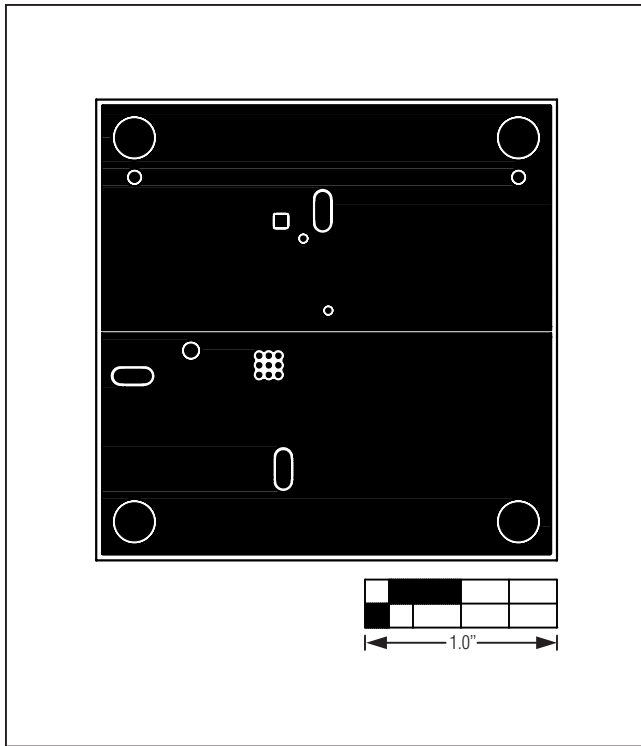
MAX15101/MAX15102/MAX15103 EV Kits PCB Layout—Inner Layer 3 Power
